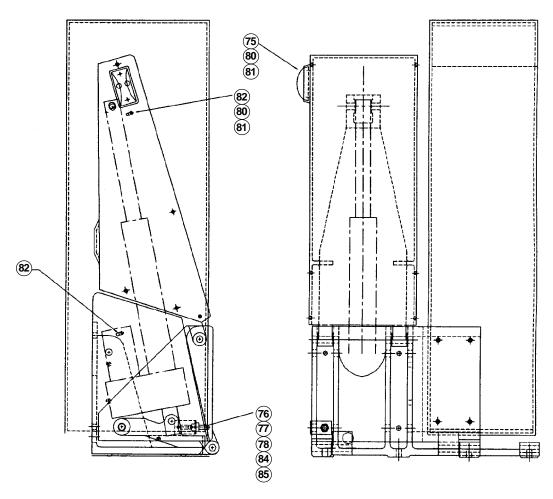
TRUCK END VIEW COMPONENT PARTS
